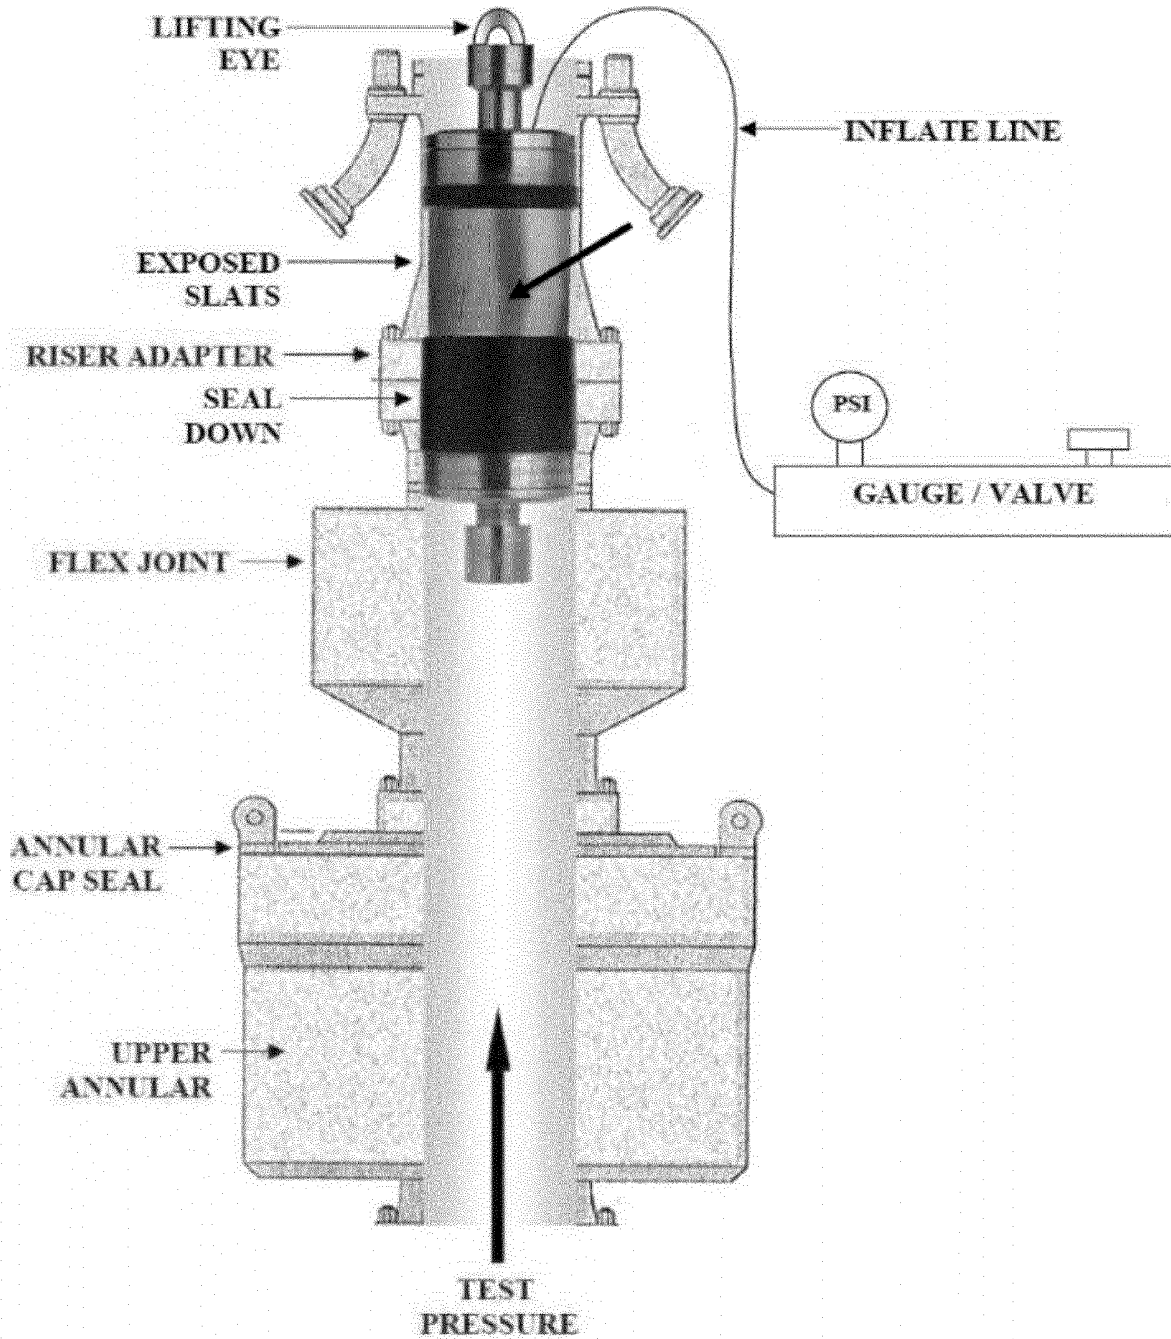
Upper annular cap seal, also see Figure 17.02, being tested using a TAM packer before the BOP is run. This is one method of testing this seal during stump testing. The flex joint and flange connection to the upper annular are also tested using this method.
